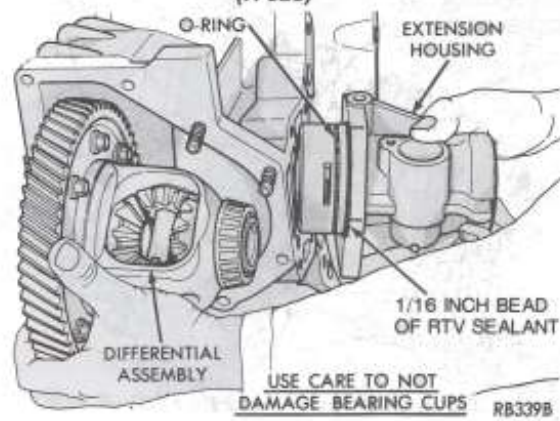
Remove or Install Differential and Extension Housing (A-525)
